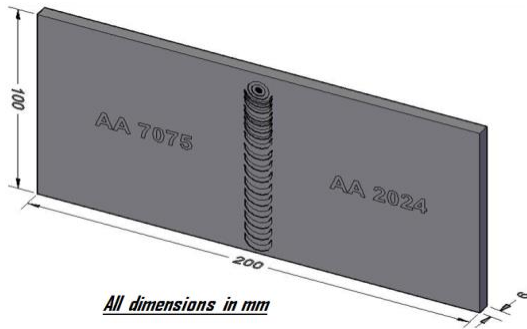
Shows the shape and dimensions of the parts to be welded
